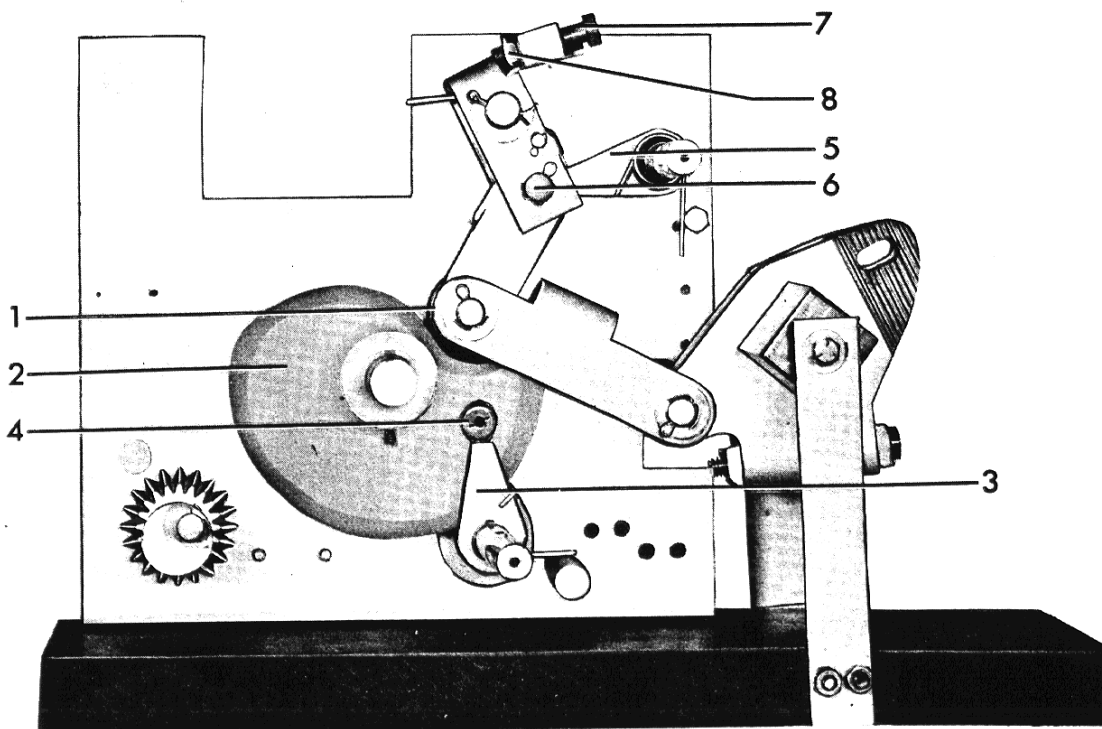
(8039445) Mechanism Linkage (Motor Mounting and Upper Plate of Mechanism Frame are Removed)
